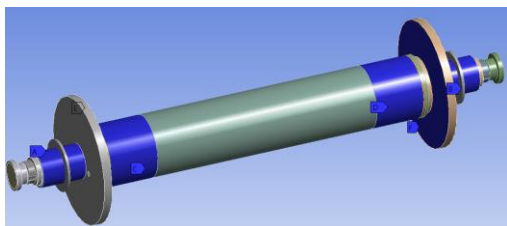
Computational model of the rotor with leaf-type foil bearings A, B – gas-dynamic leaf-type bearings (GDLB); C, D - PMB; E, F - AMB
